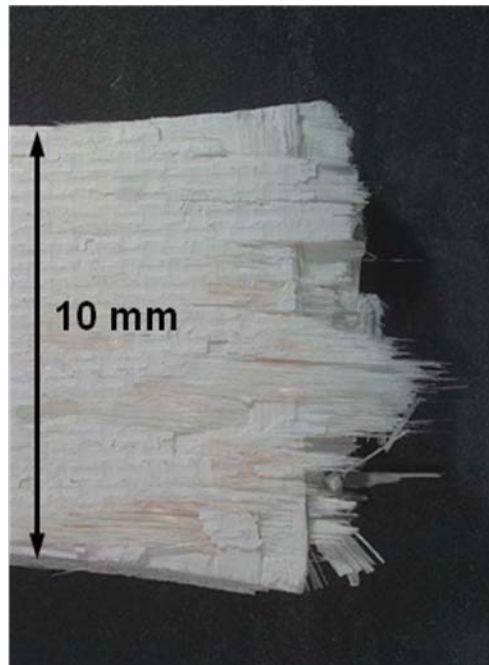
Fracture surface of the N720/AM specimen tested in tension to failure at 900°C in laboratory air.
